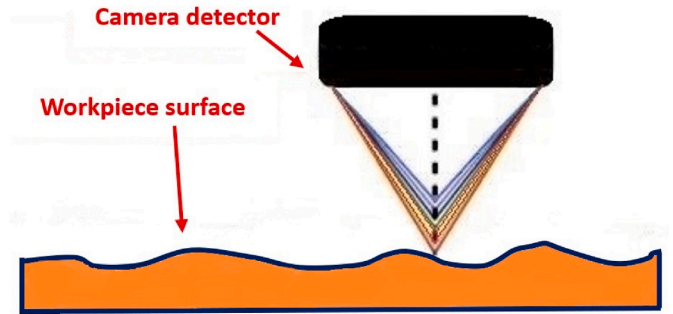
Obtaining surface quality of sample part using a 3D optical surface measuring device.
